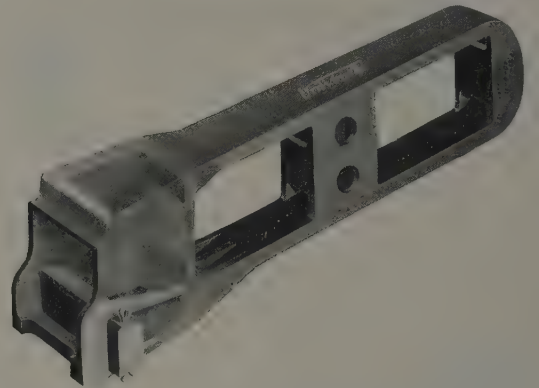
A—Universal "Rivles" Yoke for Tandem Spring Gear. Universal Draft Gear Attachment Co.
